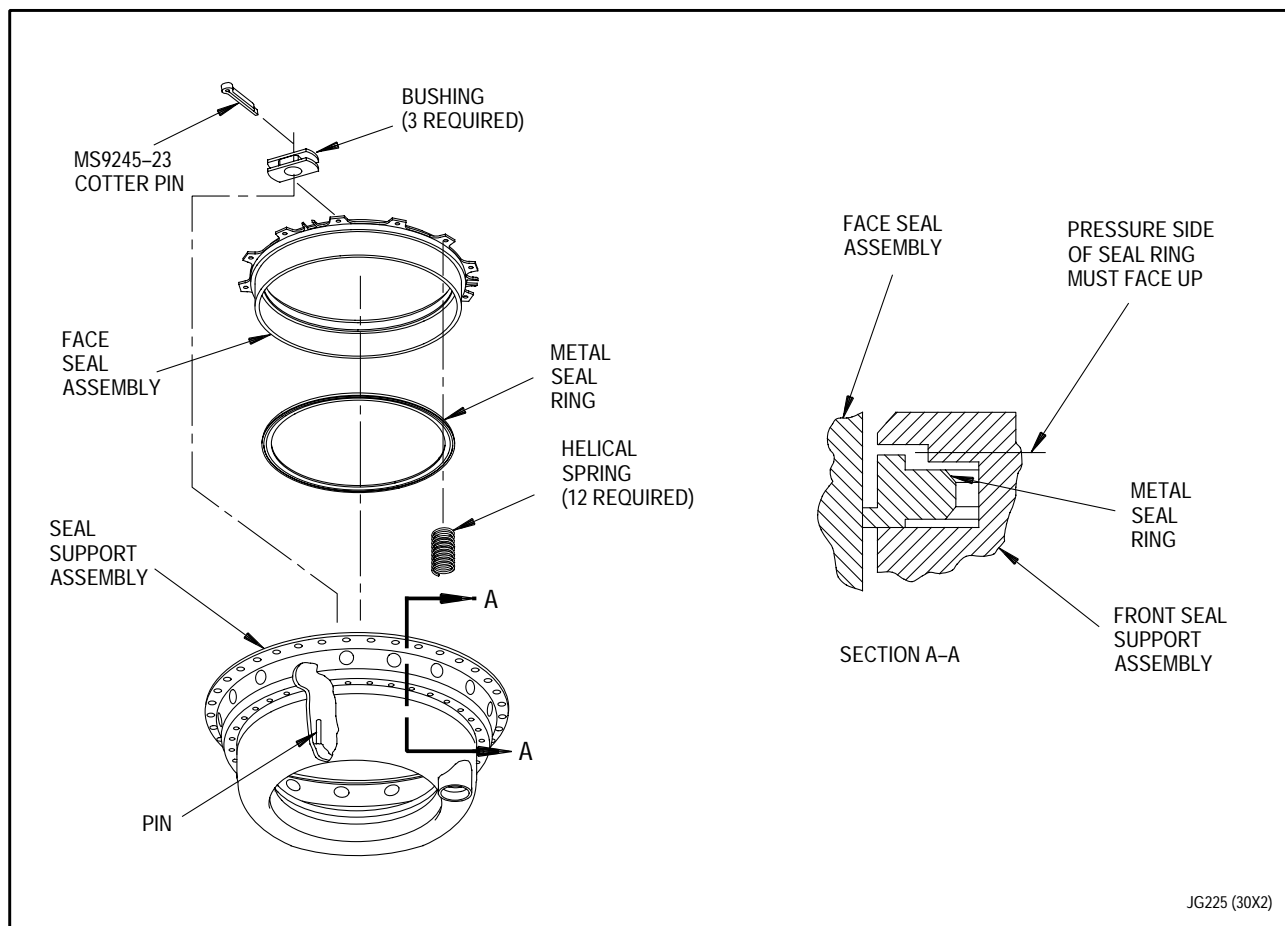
No. 4 Bearing Front Seal Assembly - Assembly
